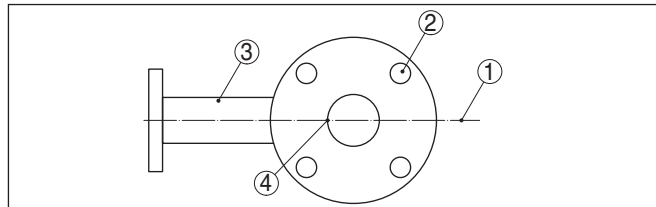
Polarisation level with flange version, view from top on the sensor and bypass tube. The sensor housing is not shown.
